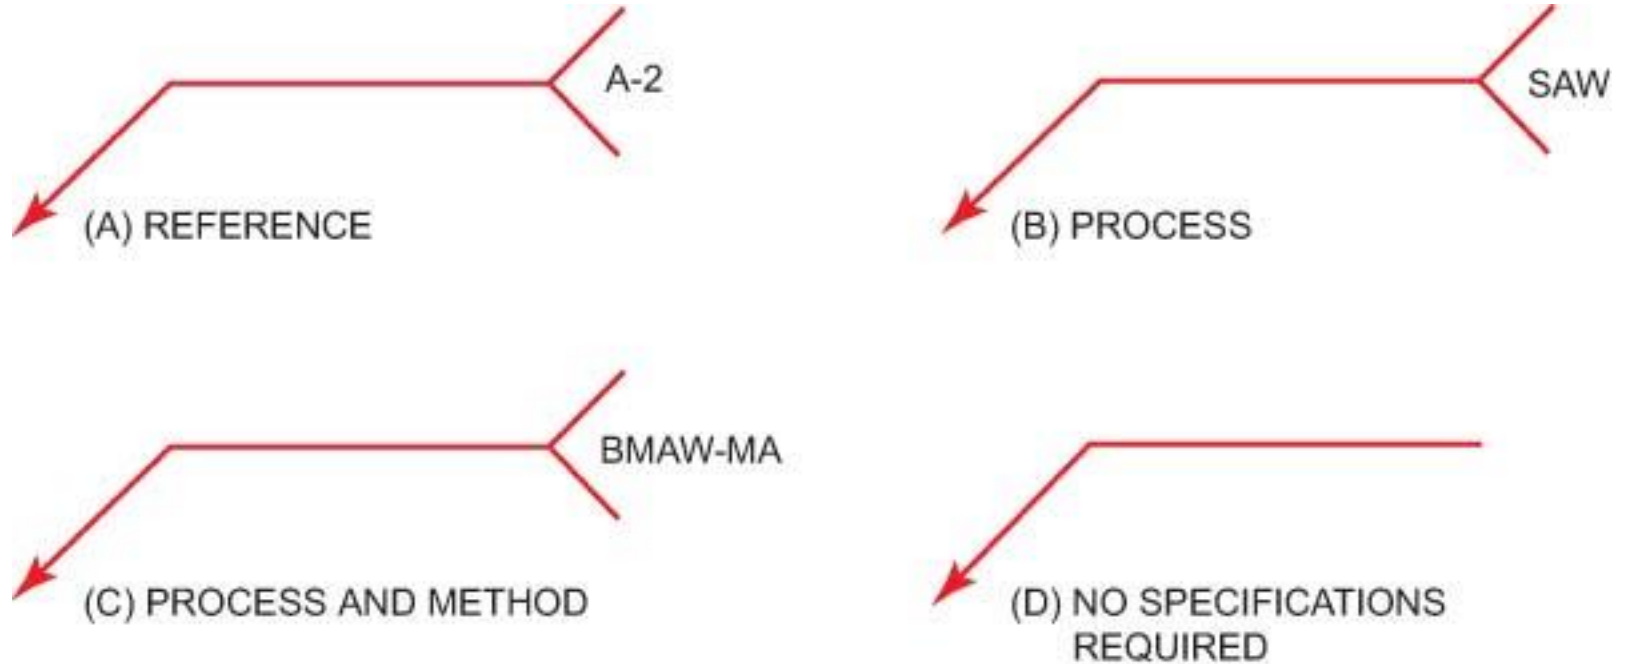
Locations of specifications, processes, and other references on weld symbols.
